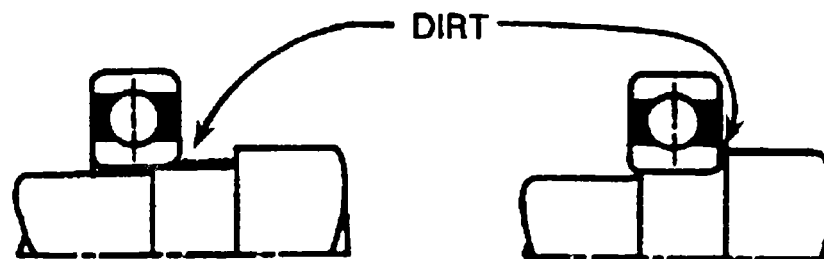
Effect of Dirt in Mounting Bearings
